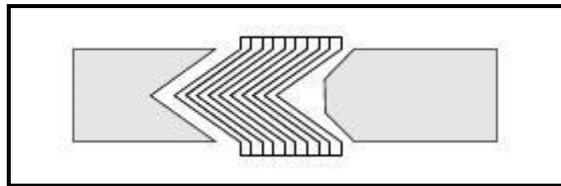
Cross section of spiral wound gasket; V-shaped profile
